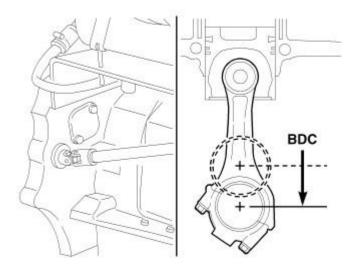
Piston/Rod Assembly At BDC Courtesy of CHRYSLER GROUP, LLC
